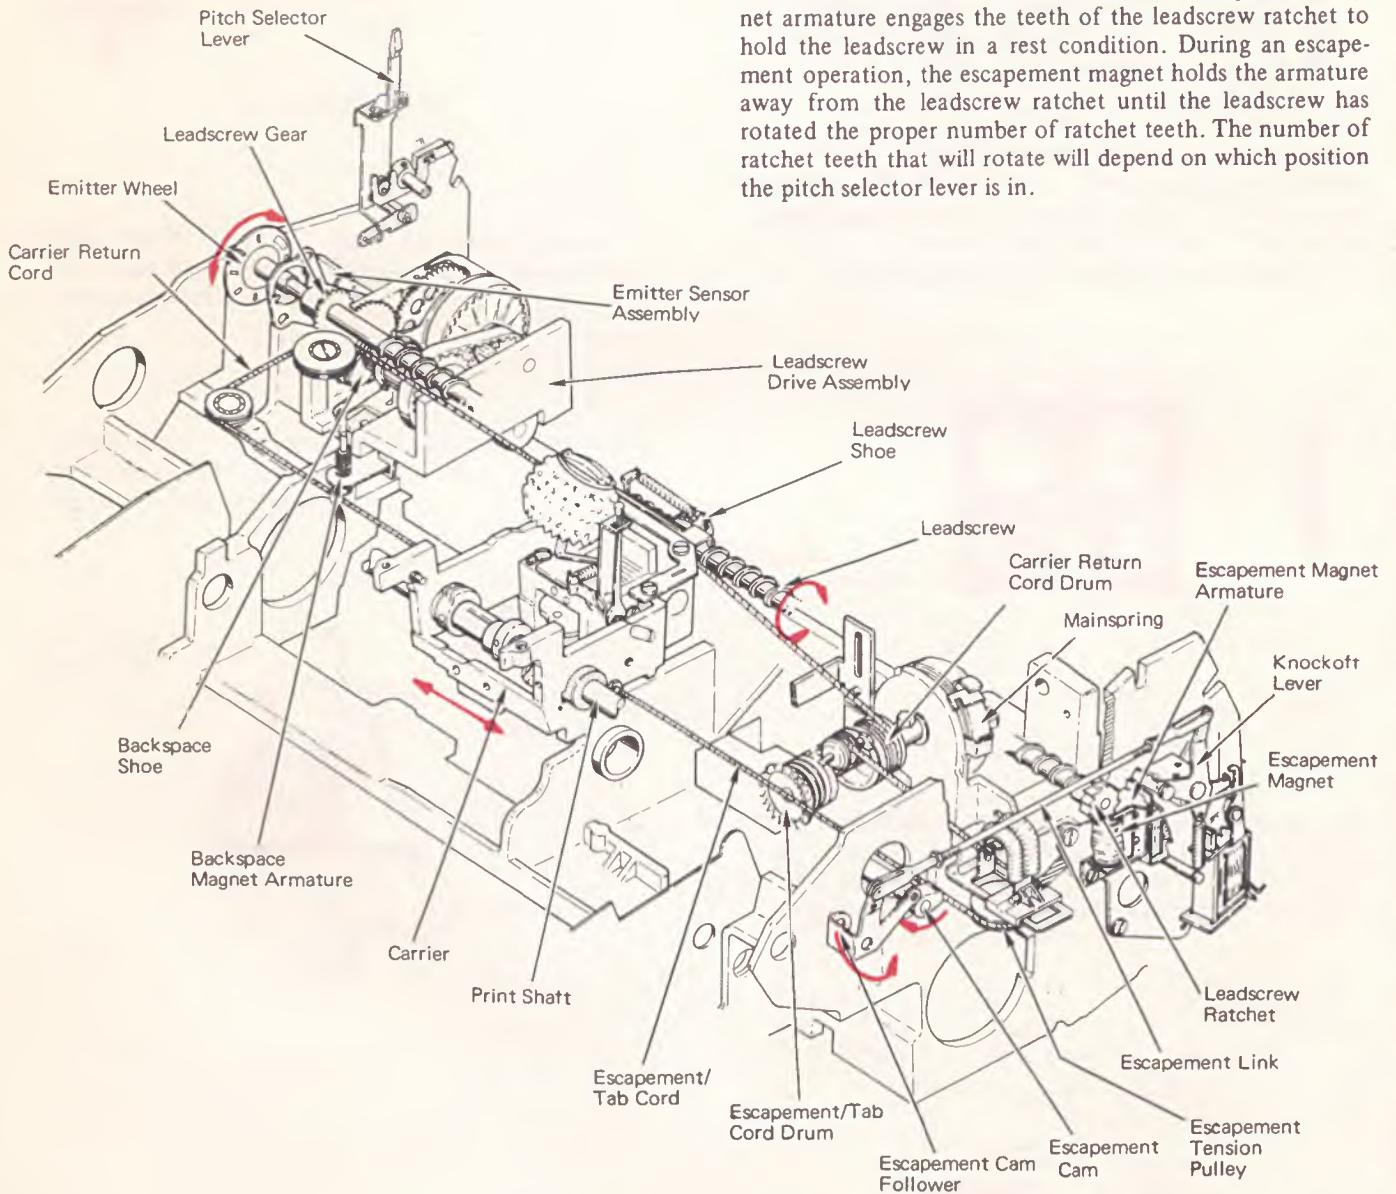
Escapement/Backspace/Deadkey Mechanism
